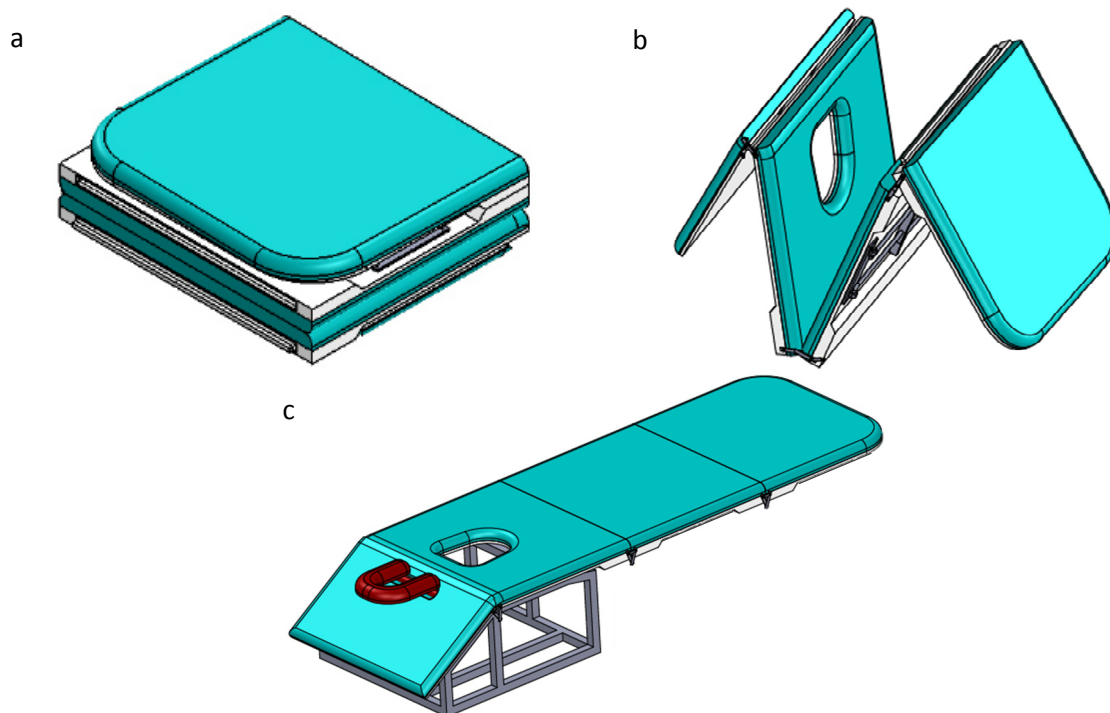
Modular surface design: a) Collapsed, b) Assembly step, and c) Assembled surface with DIET machine shell and head rest (legs of surface not shown)
